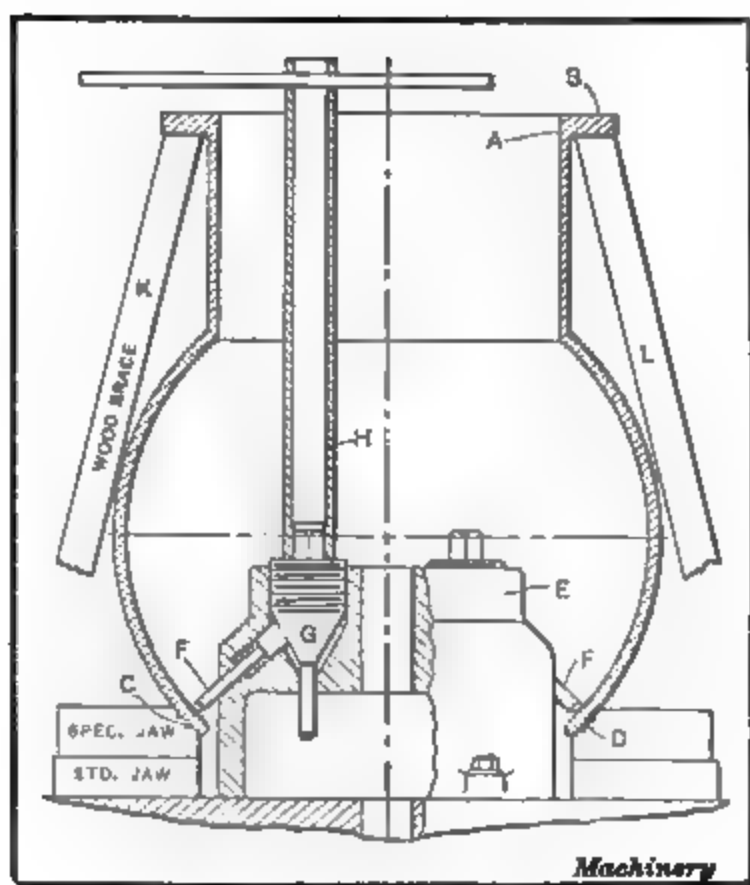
Vertical Boring Mill Fixture for holding Large Ball Joint.
